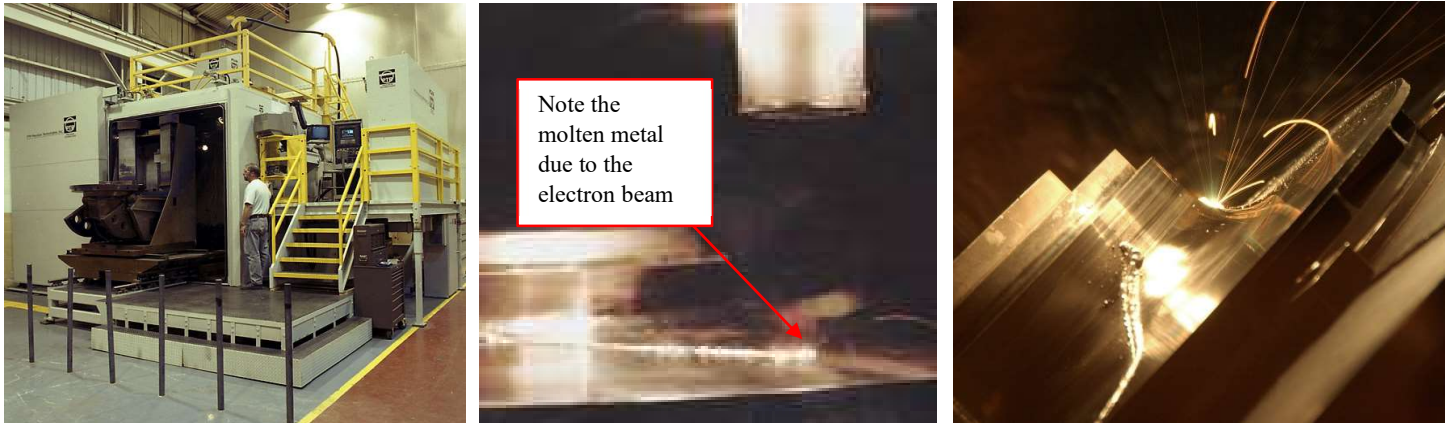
Electron beam welding system at left – Impellers being EB-welded at right
